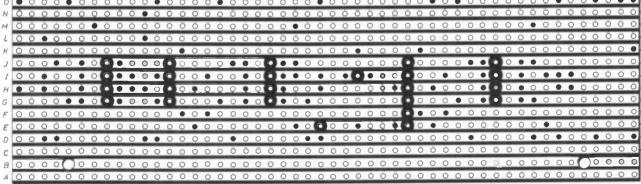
Stripboard layout of the Two-Tone Horn. Wires marked thus-\* to be omitted if the remote triggering circuit is used. See Fig. 4 for the wiring of this additional feature.
